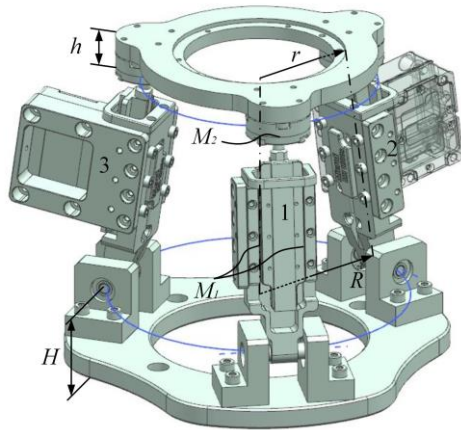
Engineering assembly model of 3-RPS parallel mechanism
